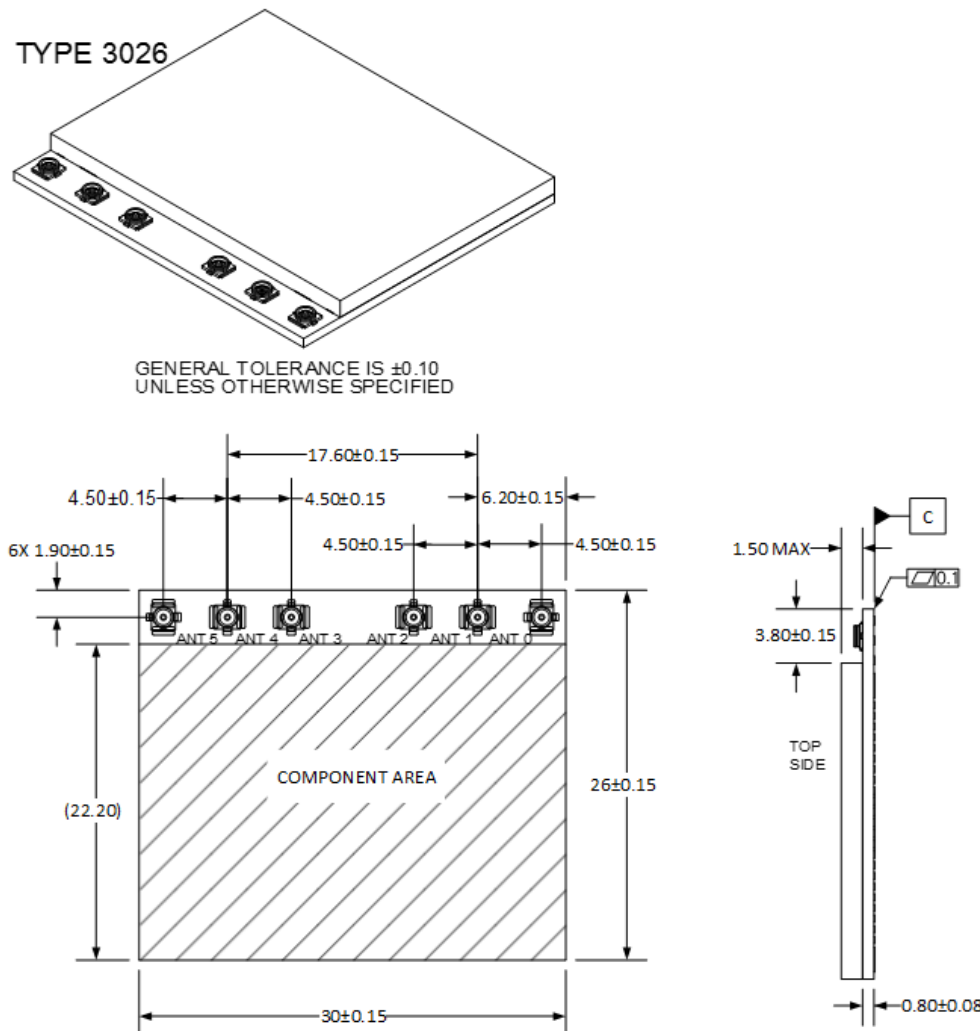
M.2 Type 3026-S3 Mechanical Outline Drawing Example
